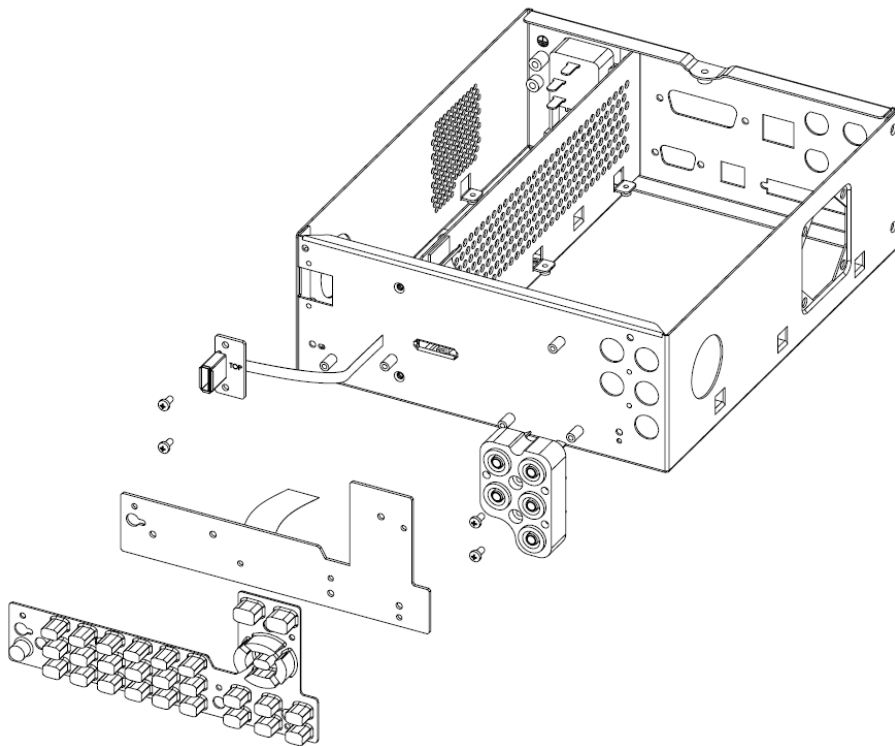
The Schematic of Disassembling and Assembling Key Board PCB
